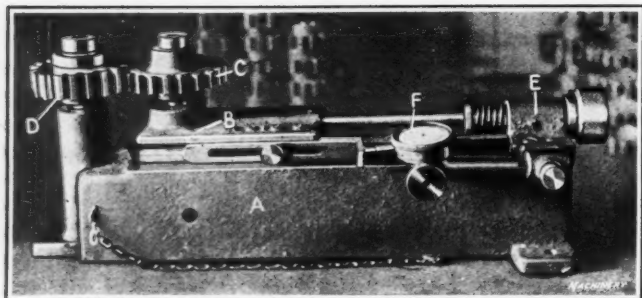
Fixture for testing Concentricity of Transmission Gears
